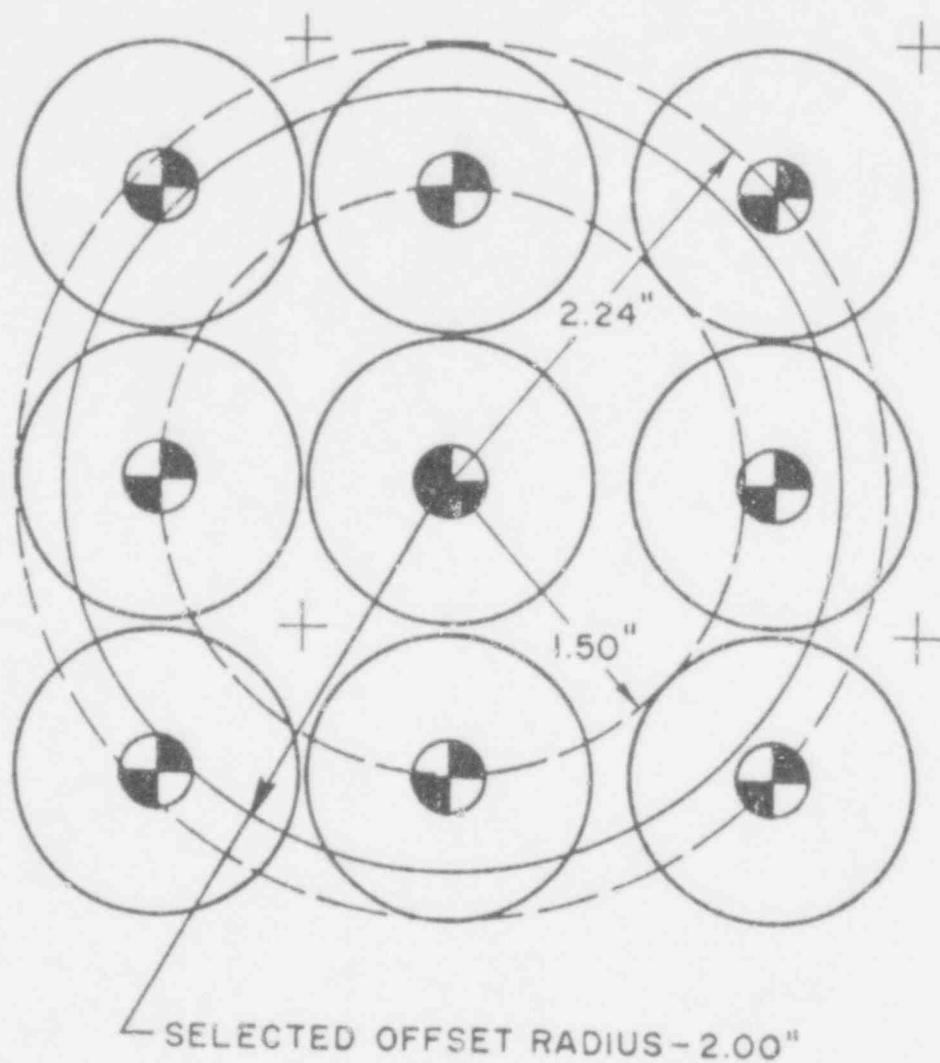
REGULATING CONTROL ROD ASSEMBLY
